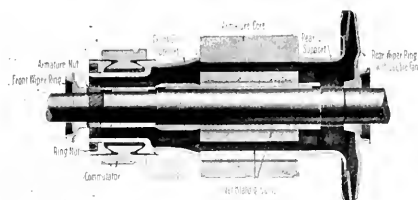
CROSS SECTION OF TYPICAL RAILWAY ARMATURE
